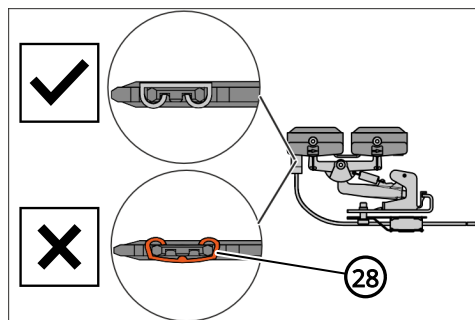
Ensure correct plug-socket connection to sliding contact.
